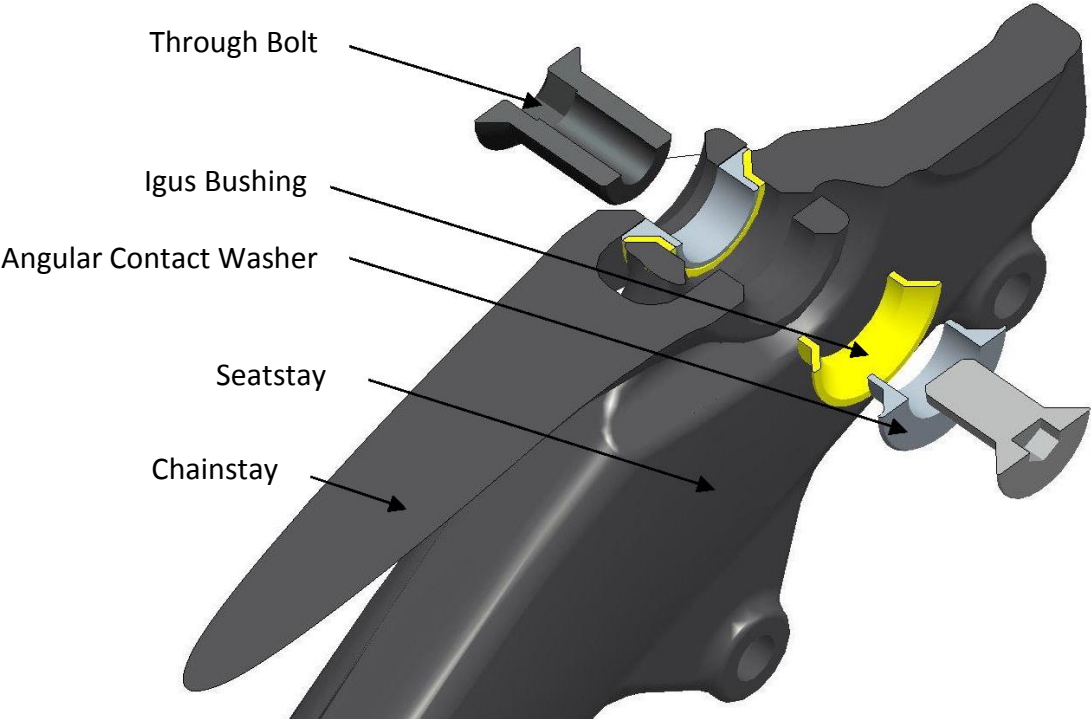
Chainstay / Seatstay pivot Cross-Section
